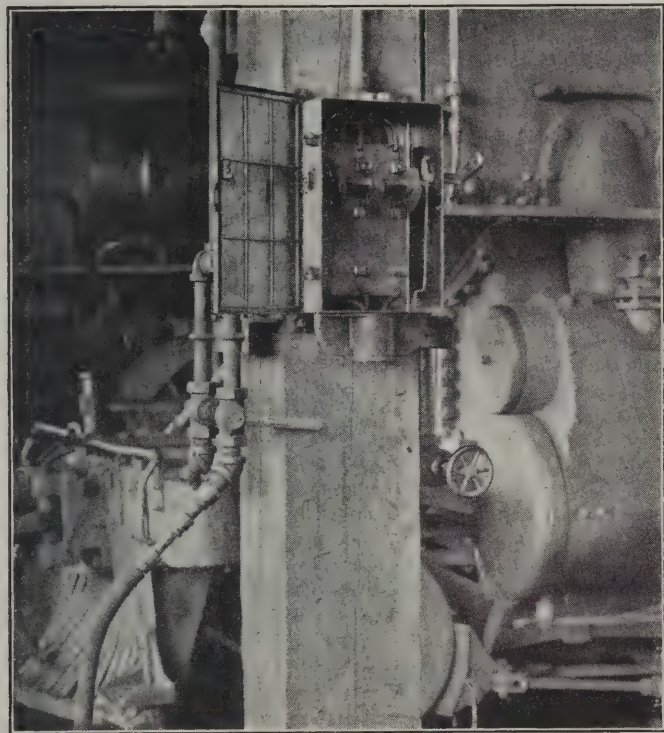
An Outlet Box from Which Power Is Taken for Operating the Portable Motor-Generator Welding Sets
